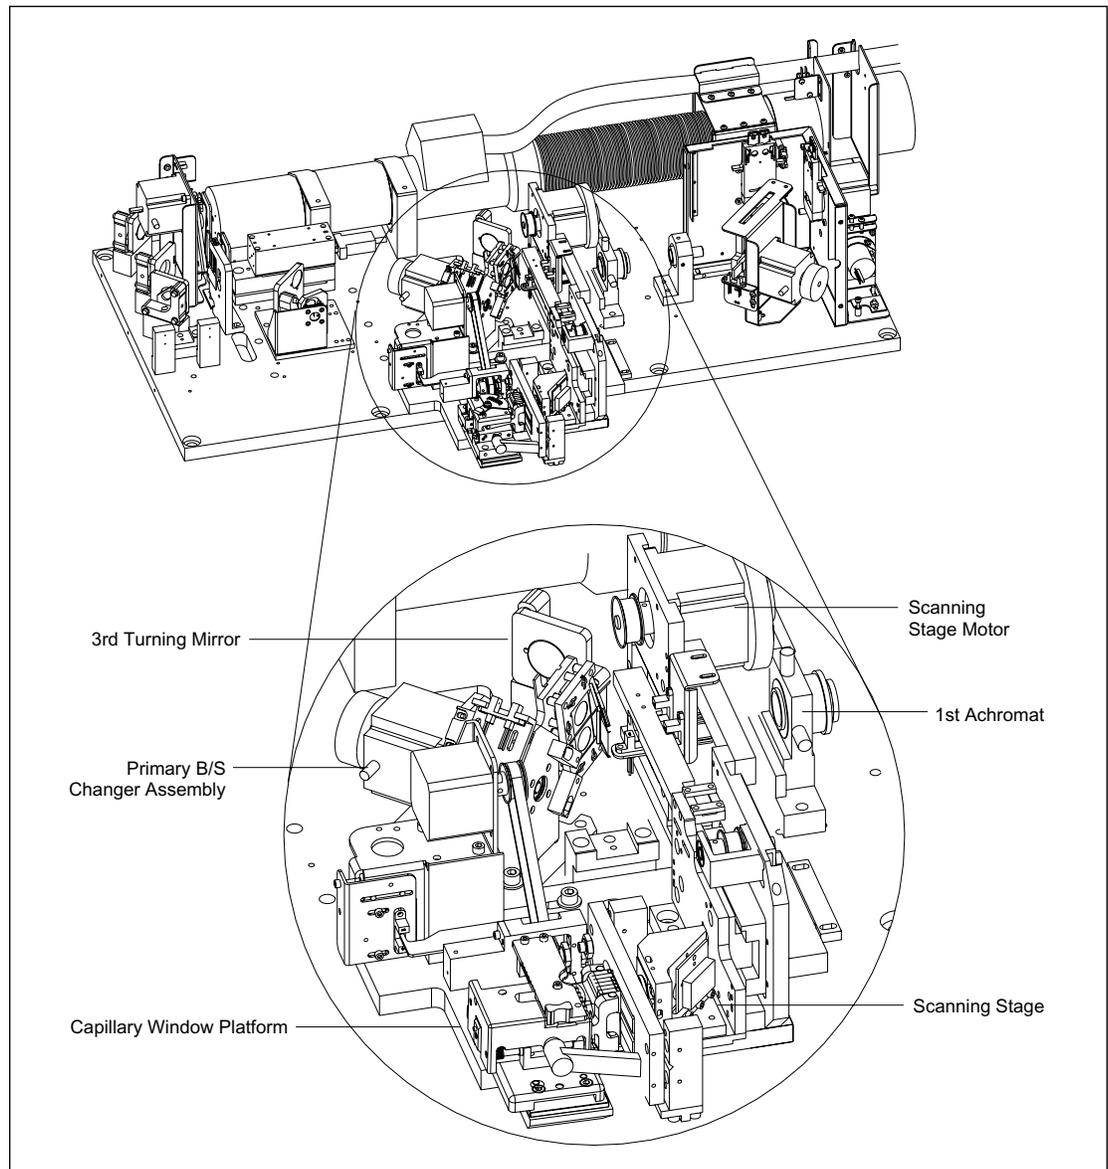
Optical Components Assembly (Sheet 2 of 3).
